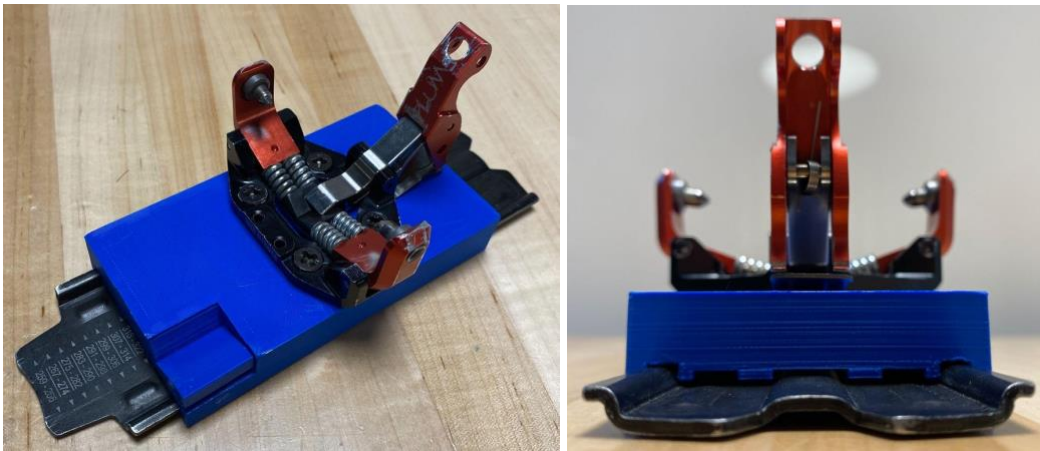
Two Views of the Completed 3D Printed Prototype Mounted to Demo Rail
